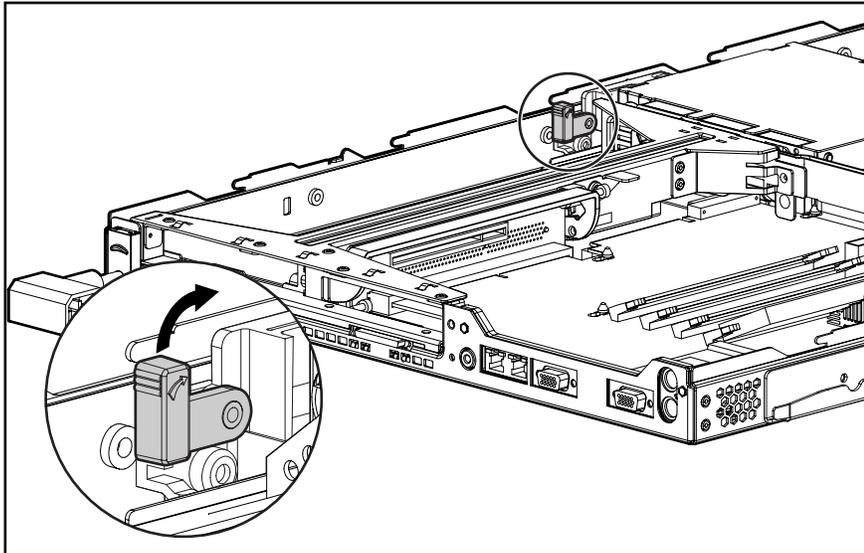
Lifting the expansion board retaining lever (expansion boards removed for clarity)
